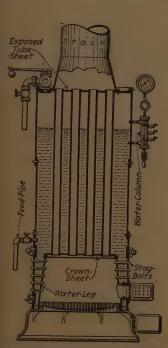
Semiportable upright fire-tube boiler having non-submerged tubes.
